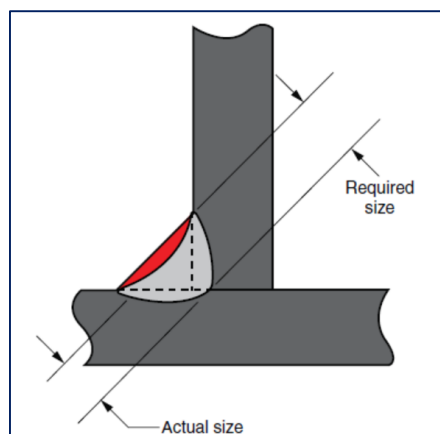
Fillet Weld Leg Length is Satisfactory [111]
